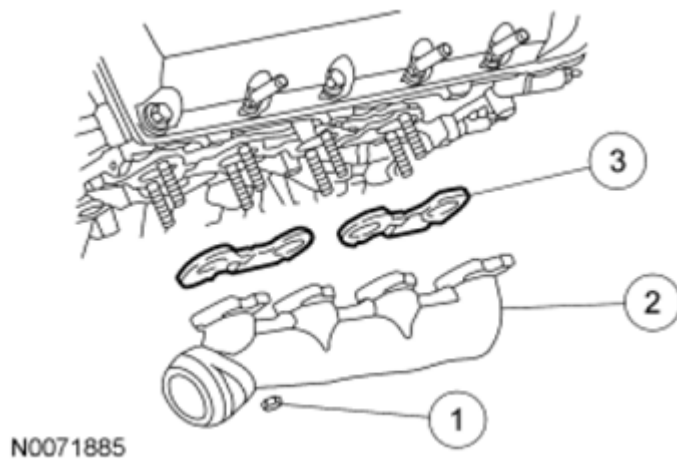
Identifying Exhaust Manifold And Exhaust Manifold Gasket
